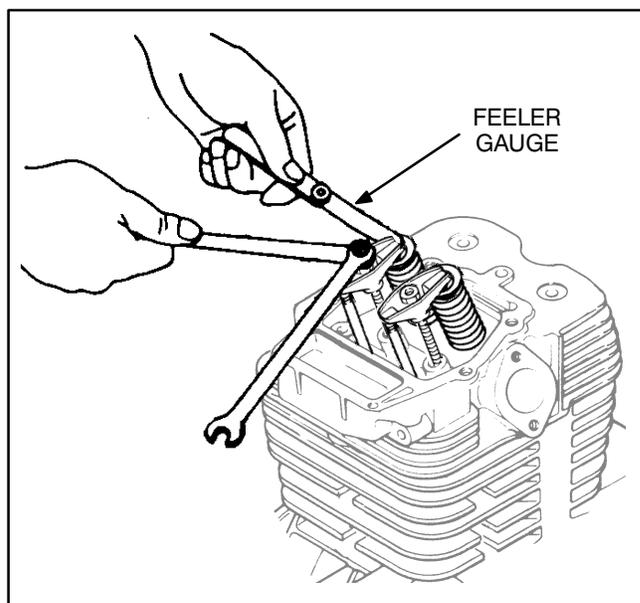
VALVE CLEARANCE ADJUSTMENT
